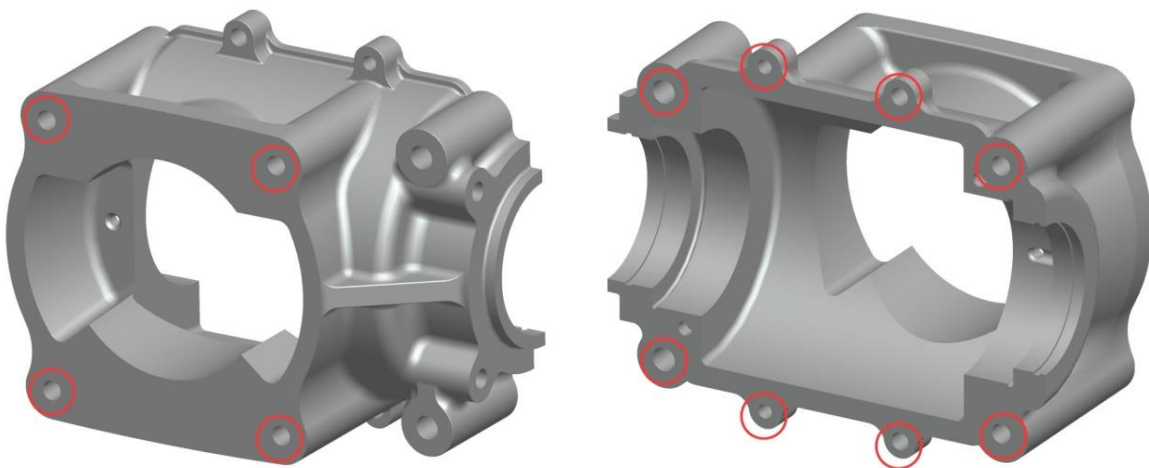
CRANKCASE CYLINDER FLANGE JOINT 2 (LEFT) AND SEAM BOLT JOINT 3 DISPLAYED (RIGHT).
